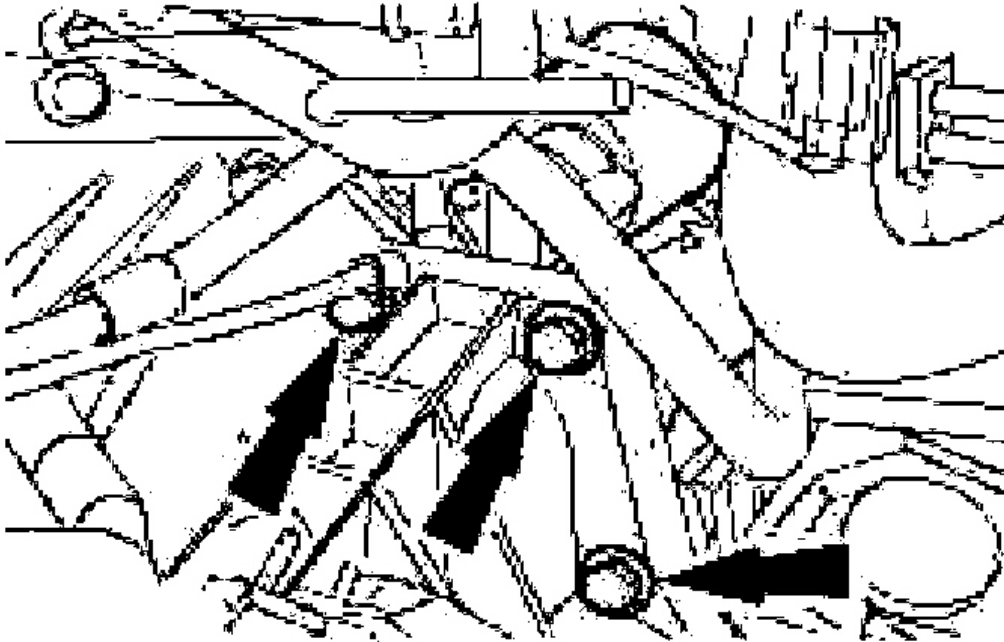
Hooking Engine And Transmission Assembly Into Crane
